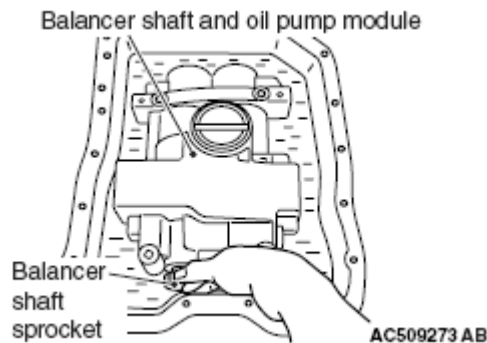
Turning Balancer Shaft Sprocket Of Balancer Shaft And Oil Pump Module
